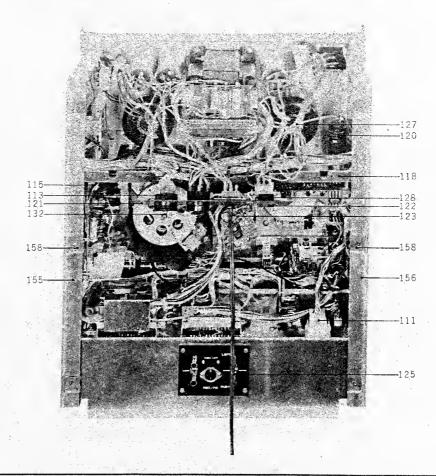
(C) PHOTO OF MECHANISM ASSEMBLY BLOCK
